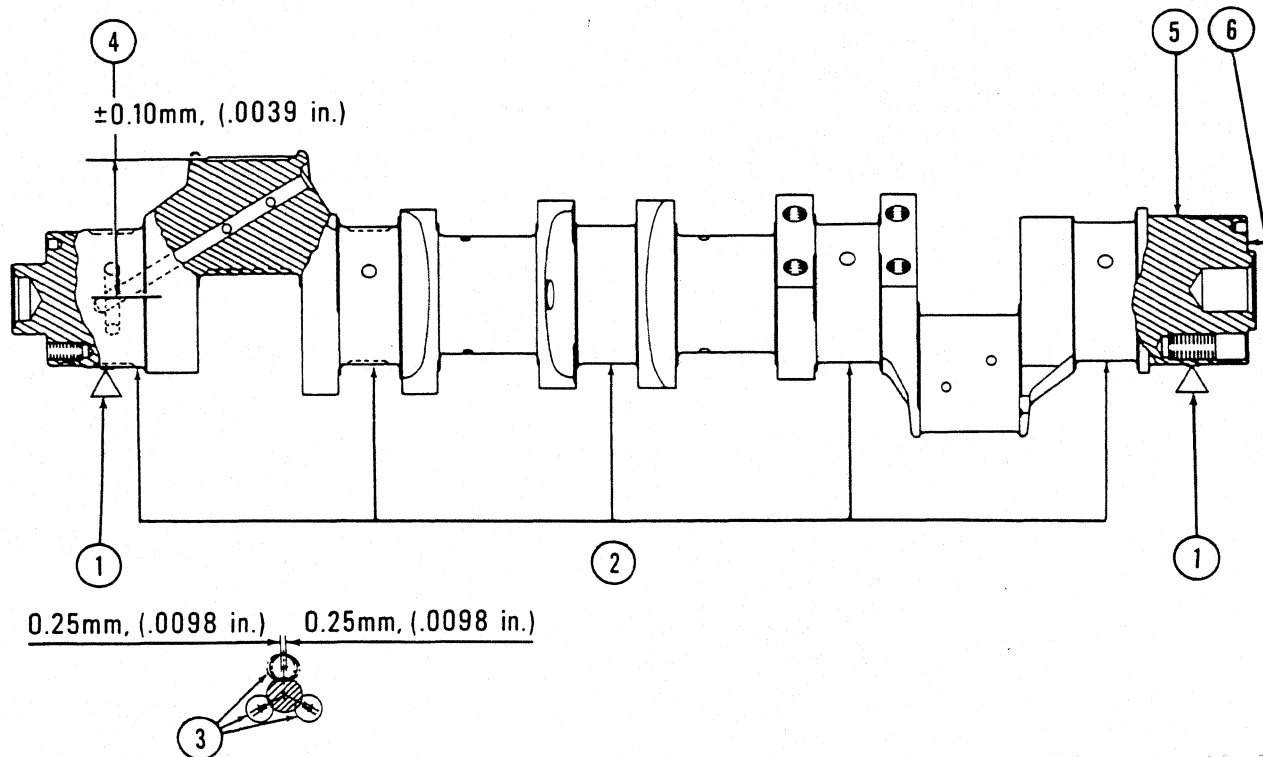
CHECKING MAIN AND CONNECTING ROD JOURNAL ALIGNMENT
